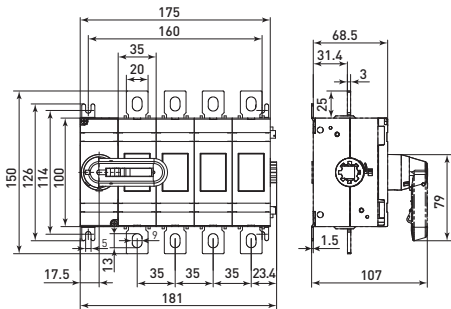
Overall and installation dimensions of 160-250 A 4P switch disconnectors
